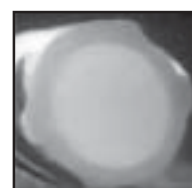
This photo, provided by HSE Germany, shows a typical Thermex rebar
